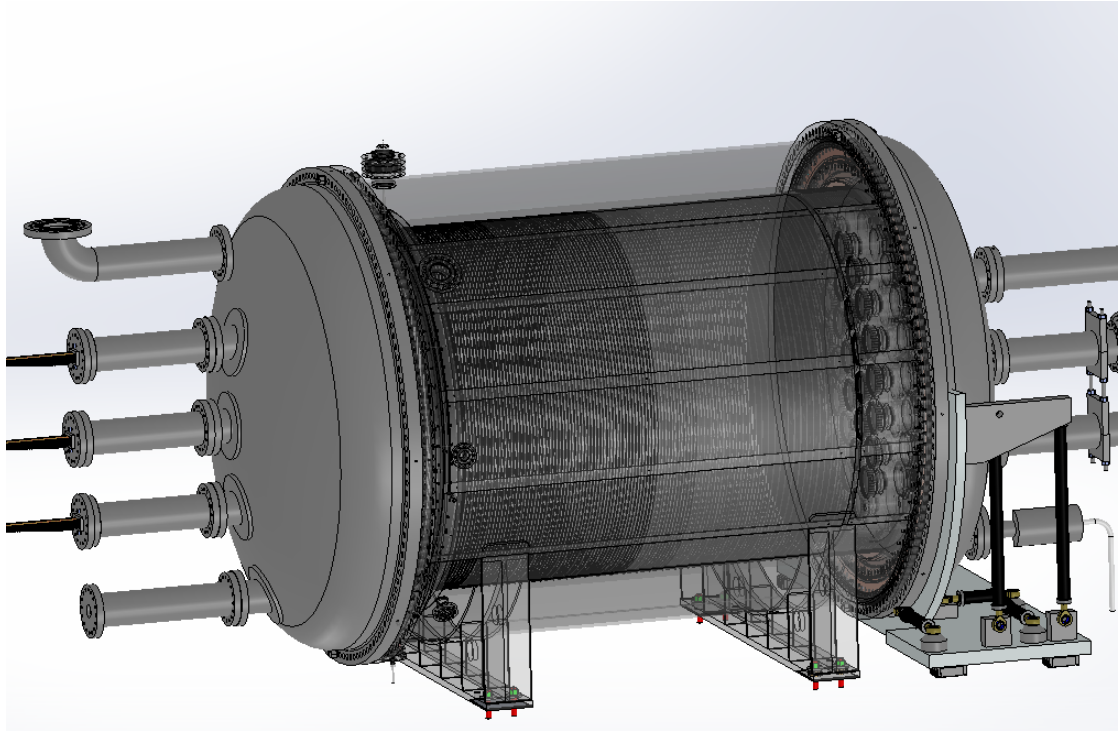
A 3D drawing of the detector showing the field cage inside.
